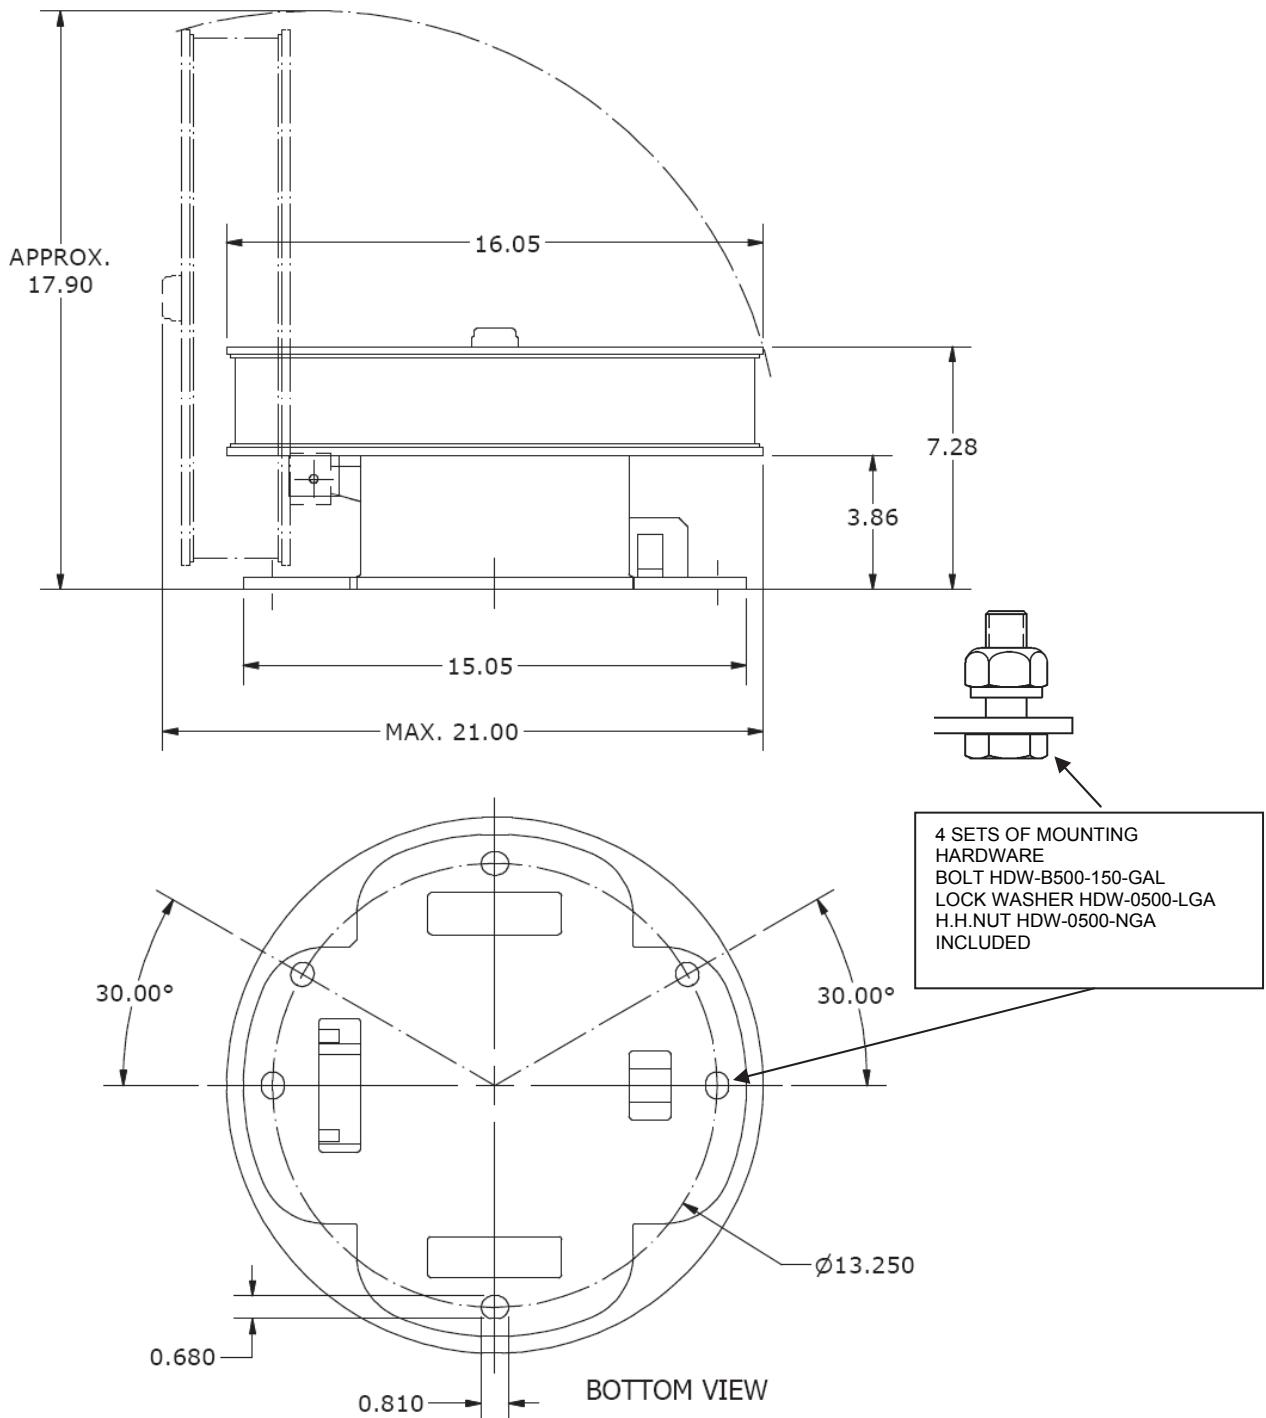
IFH-D1RW-8SP Beacon Dimensions and Mounting Detail
